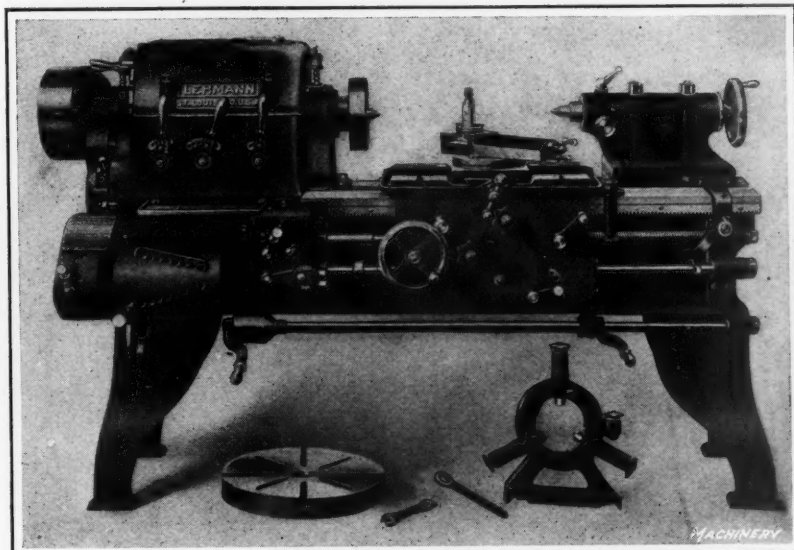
Geared-head Engine Lathe built by the Lehmann Machine Co., which has Sixteen Spindle Speeds
